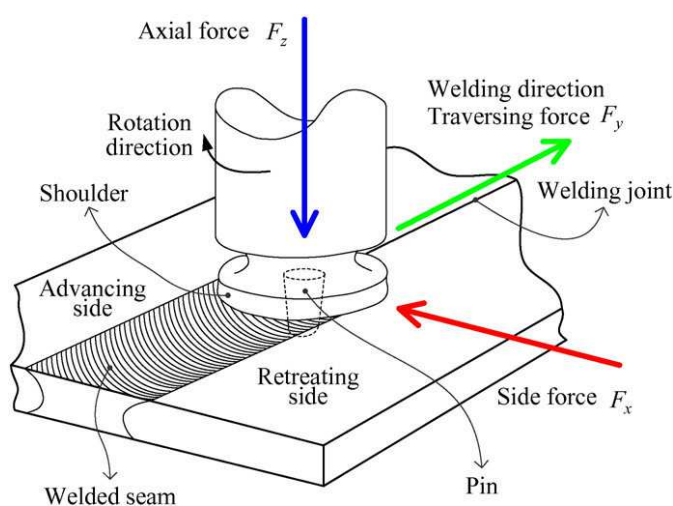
Schematic of the friction stir welding process [5]
